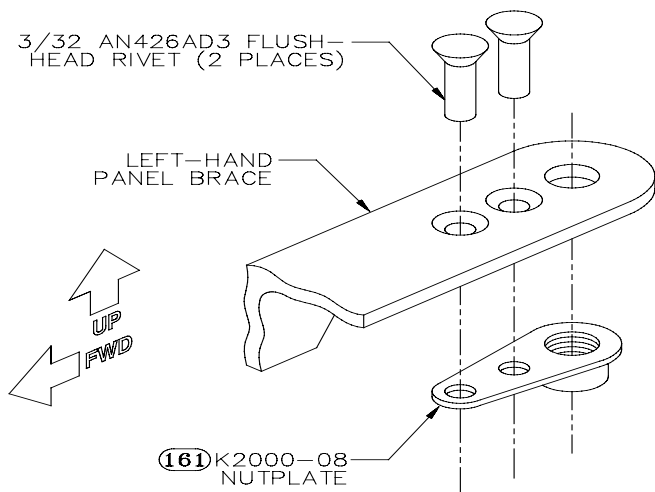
Riveting a Nutplate to the Aft End of the Panel Brace
